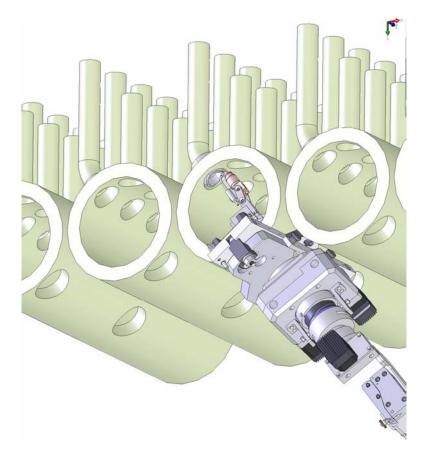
A schematic of the header-to-stub tube welding device inserted into a header. The actual welding device is shown in Figure 3-32.
